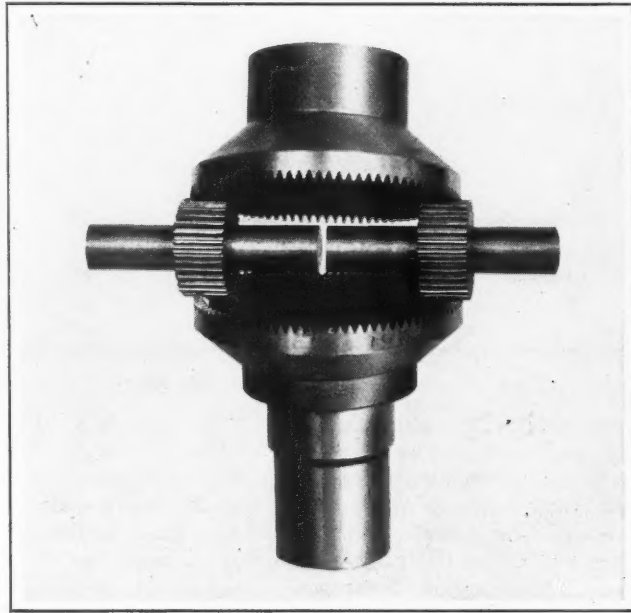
Possible Arrangement for Shafts that are not in Alignment
